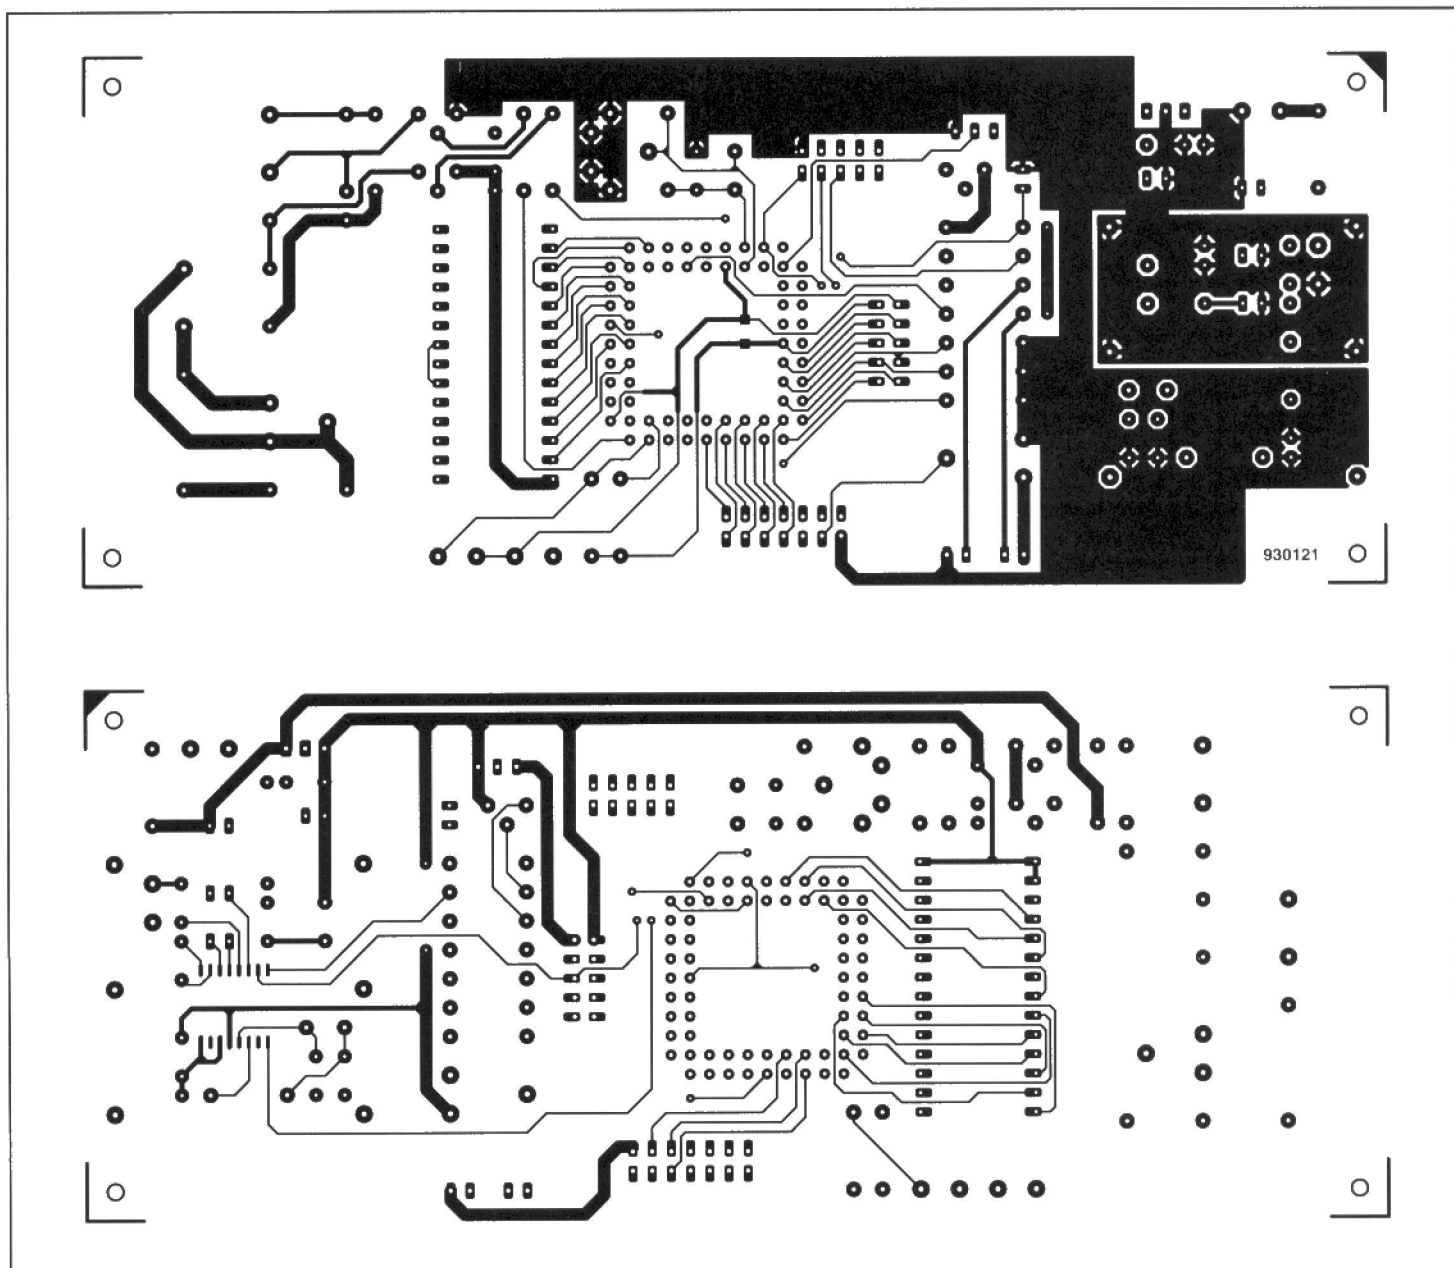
PCB component side and solder side copper layouts (direct reading).
